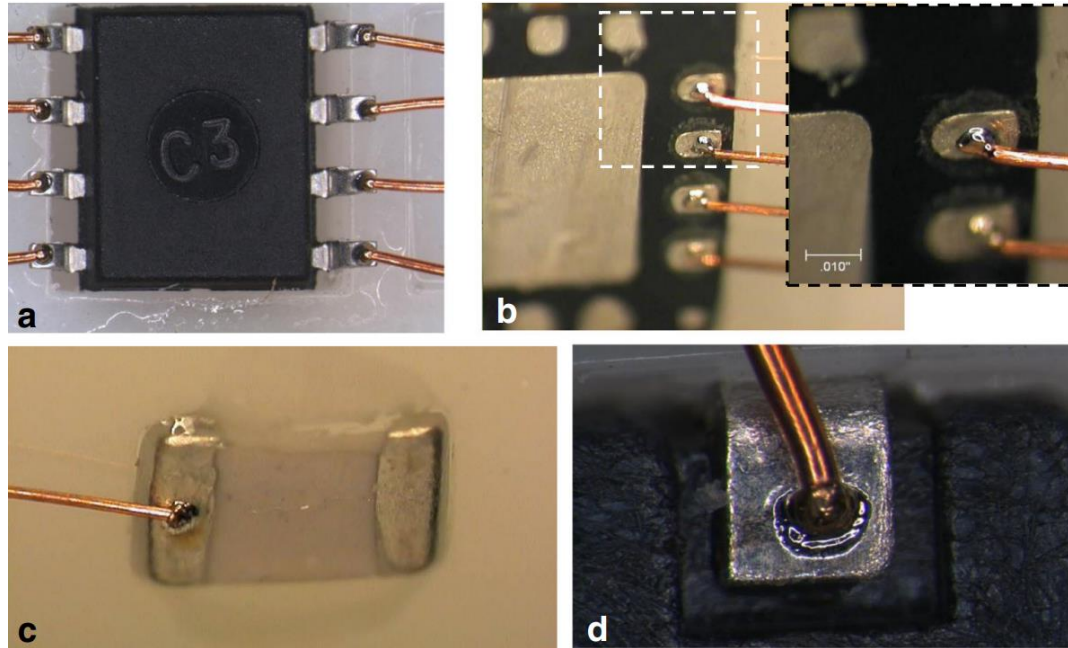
Laser-welded interconnects used in ultrasonic wire embedding [4]
